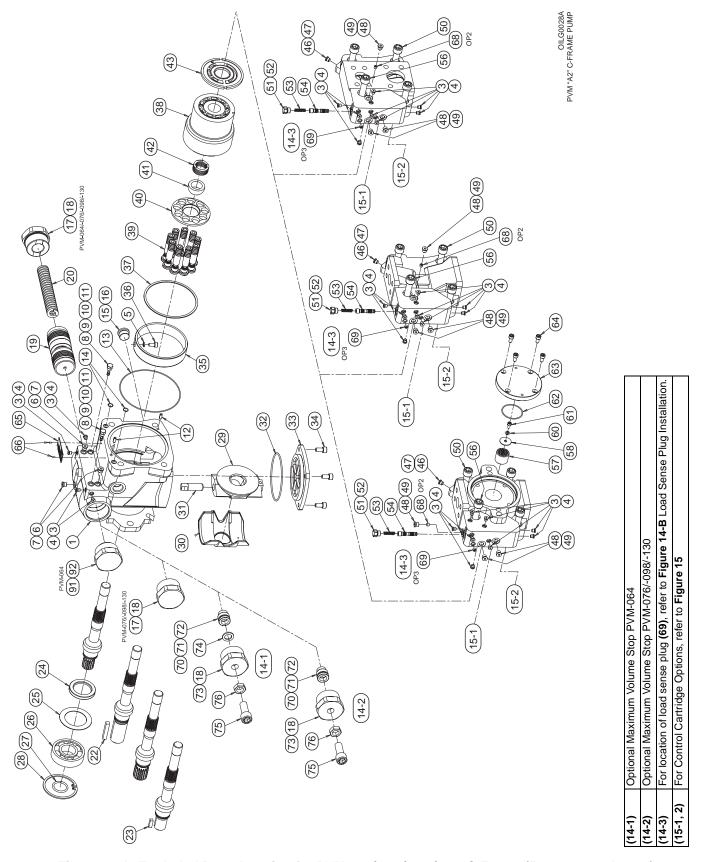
A. Exploded Parts Drawing for PVM-064/-076/-098/-130 C-Frame (519272-302 sheet 1) For Control Cartridge Options, refer to Figure 15 and for Thru-shaft Options, refer to Figure 14-C.
